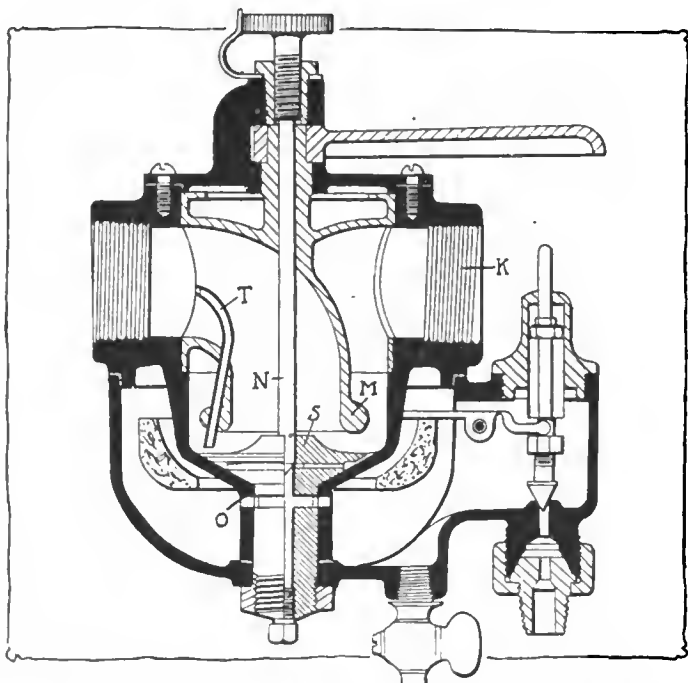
Krause carbureter has no needle valve, but annular gasoline passage
